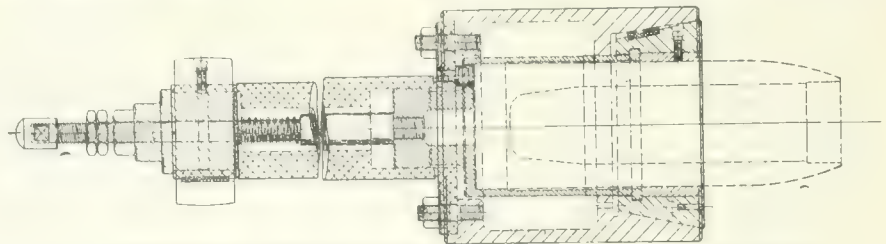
DRAW-BACK CHUCK FITTED TO NO. 5 SHELL BORING LATHE
